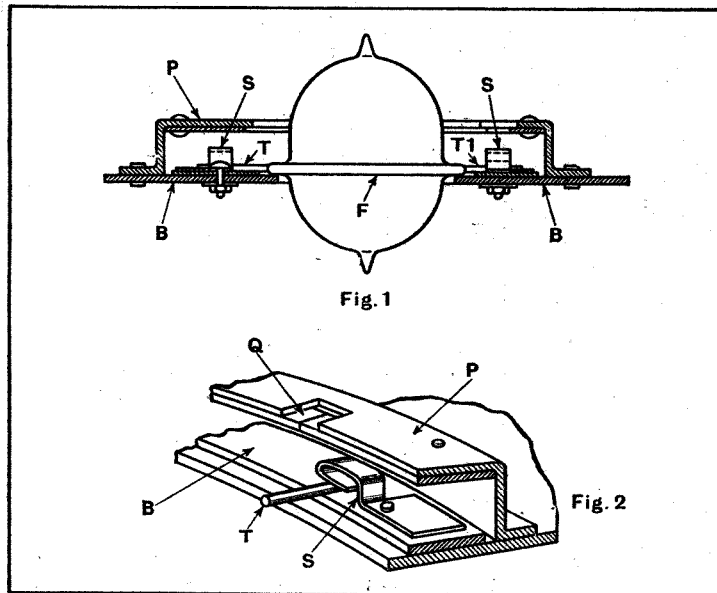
Low-capacity holder for "Acorn" valves. Fig. 2.—Enlarged view of one of the spring contacts.
